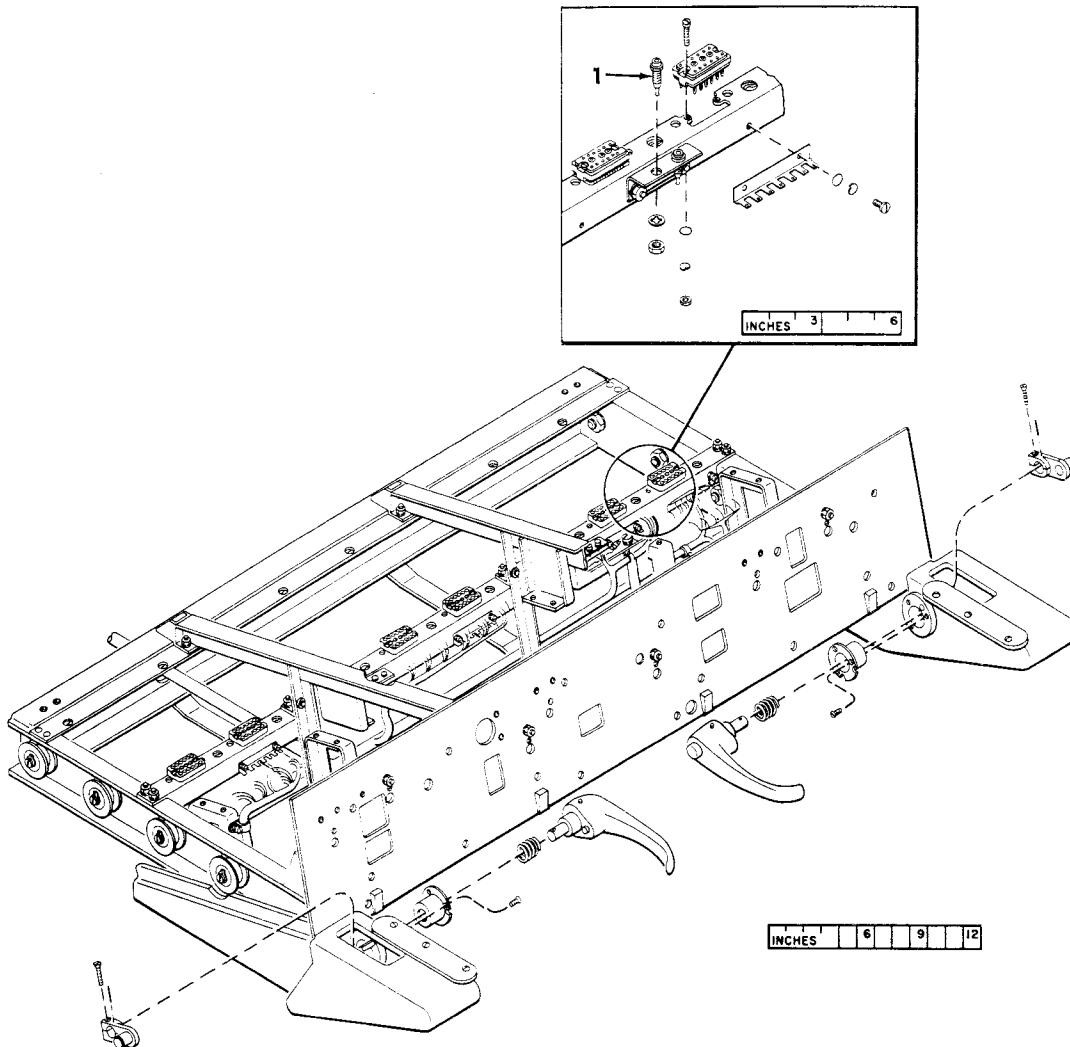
Control drawer, missile track (8511278)—partial exploded view
